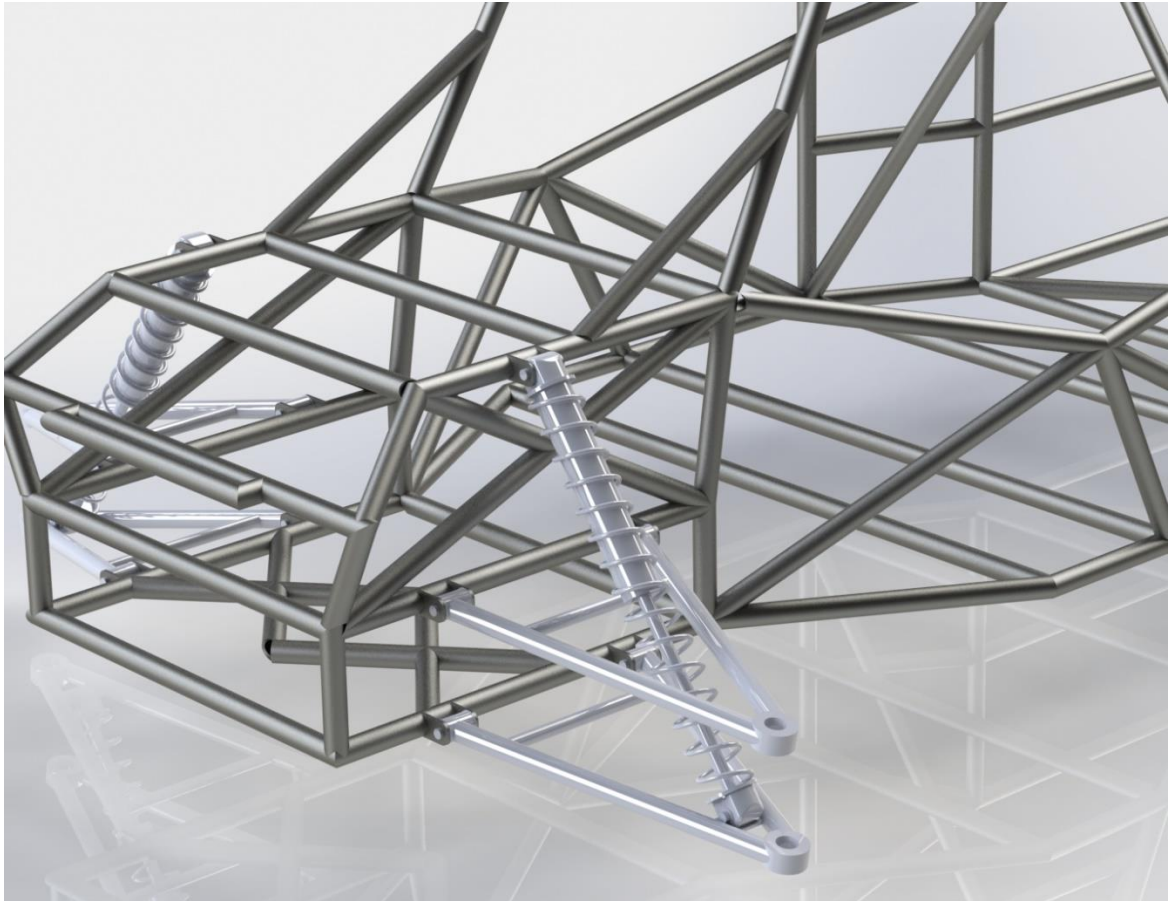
Designed front double wishbone suspension system with damper mounting on lower A-arm
